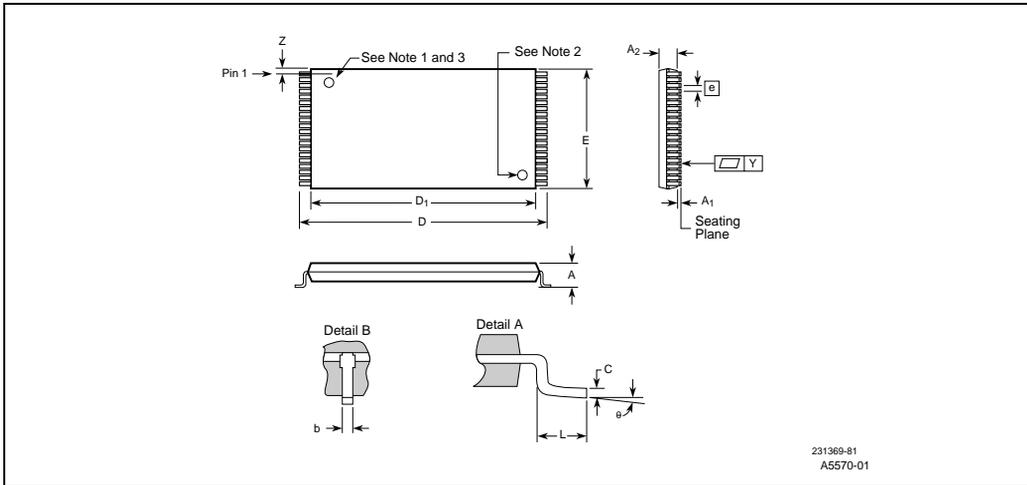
40-Lead TSOP Package Drawing and Specifications
